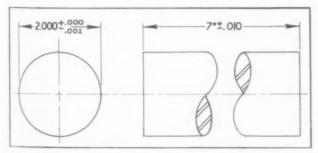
The diameter—2.000+.000-.001 in—is expressed as a unilateral tolerance in that it is all in one direction. The length—7+/-.010—is expressed in a bilateral tolerance since the limits of tolerance can go in either direction.
